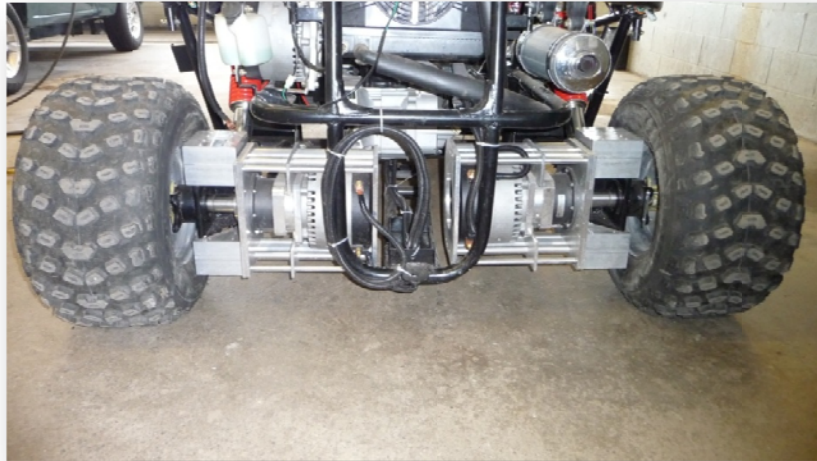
1st Design Iteration Prototype Manufactured and Assembled
